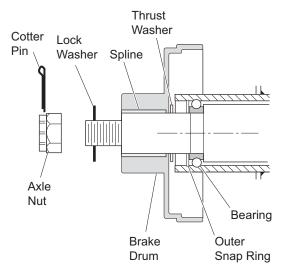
Cut Away of Outer Bearing and Brake Drum
